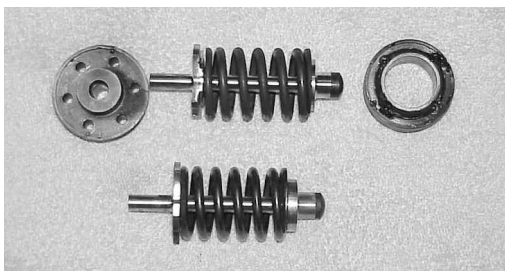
Mechanical Overspeed Mechanism Disassembled.
